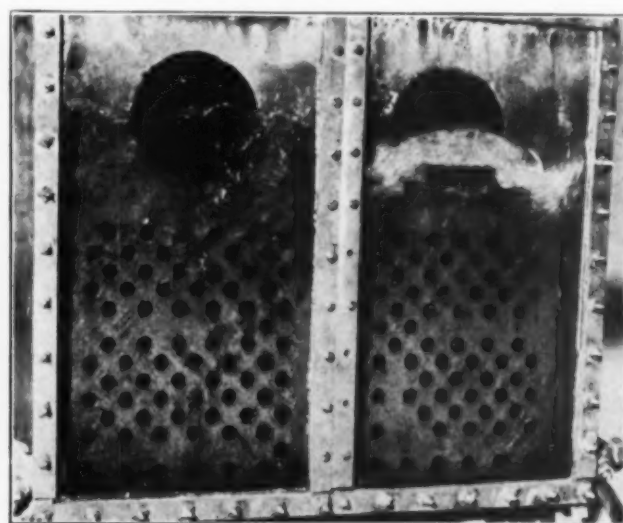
REAR HEADERS CORRESPONDING TO HEADERS OF FIG. 13 IN FRONT; LOAD 450 PER CENT; SETTING AS IN FIG. 3a
